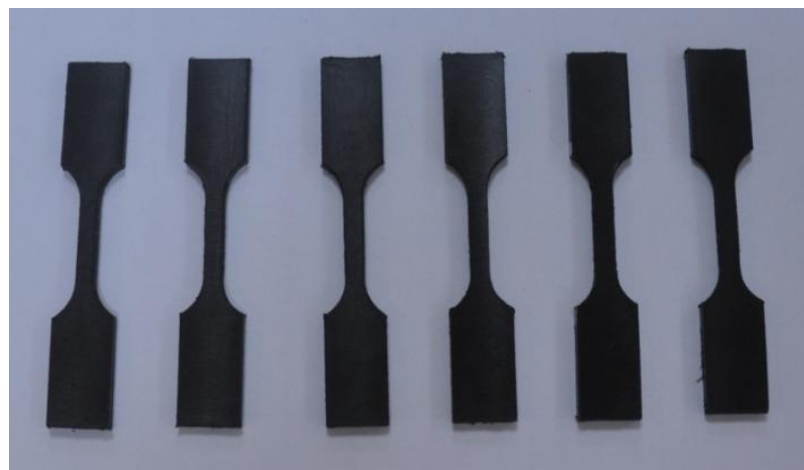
Machined Fusion Weld Tensile Samples
